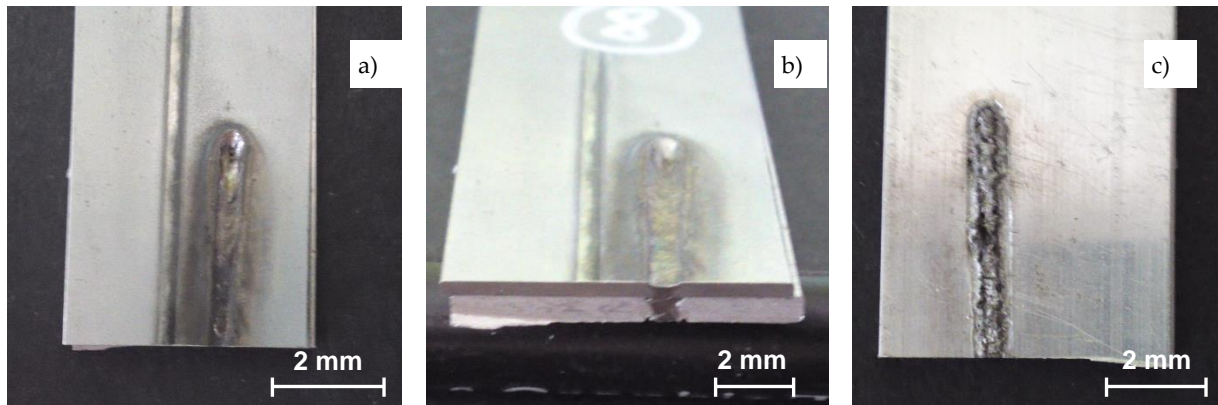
Weld face a) weld cross-section; b) weld ridge – high porosity visible; c) sample No. 8
